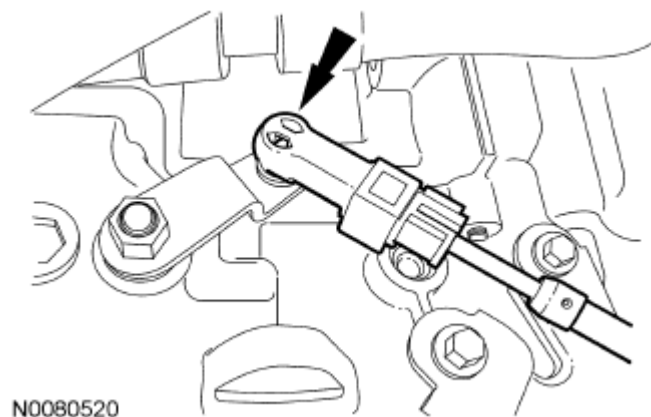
Locating Transaxle Manual Lever Shift Cable
